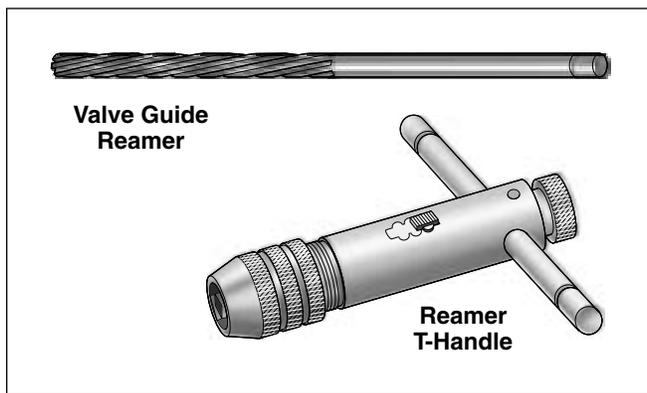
Valve Guide Reamer (Part No. B-45523) and Reamer T-Handle (Part No. HD-39847)
